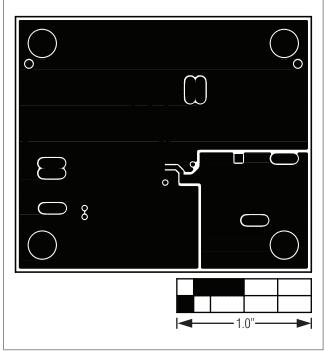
MAX15051 EV Kit PCB Layout—Inner Layer 2
